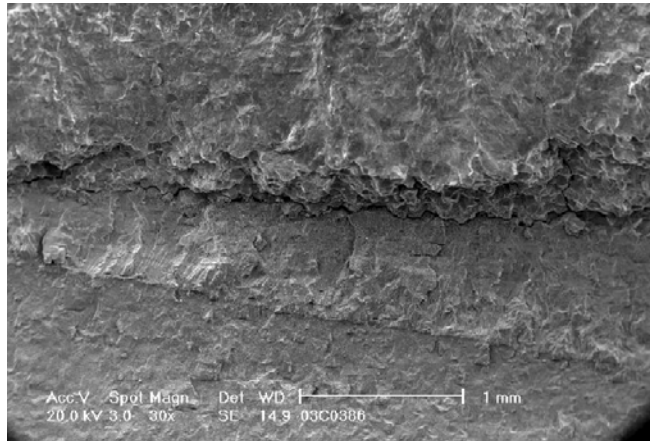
Fracture surface of the 25 mm sensitized AISI 304 steel C(T) specimen in the middle of the specimen. Pre-fatigue, transgranular fatigue formed during the stress corrosion cracking initiation phase in the autoclave, intergranular cracking formed during the constant load and constant displacement phases, and post-test fatigue can be distinguished from the photograph (from the bottom to the top, respectively). Simulated BWR water, $T = 290^{\circ}\text{C}$, conductivity (outlet) = $0.15\text{--}0.2 \mu\text{S/cm}$, dissolved O_2 (outlet) = 500 ppb.
